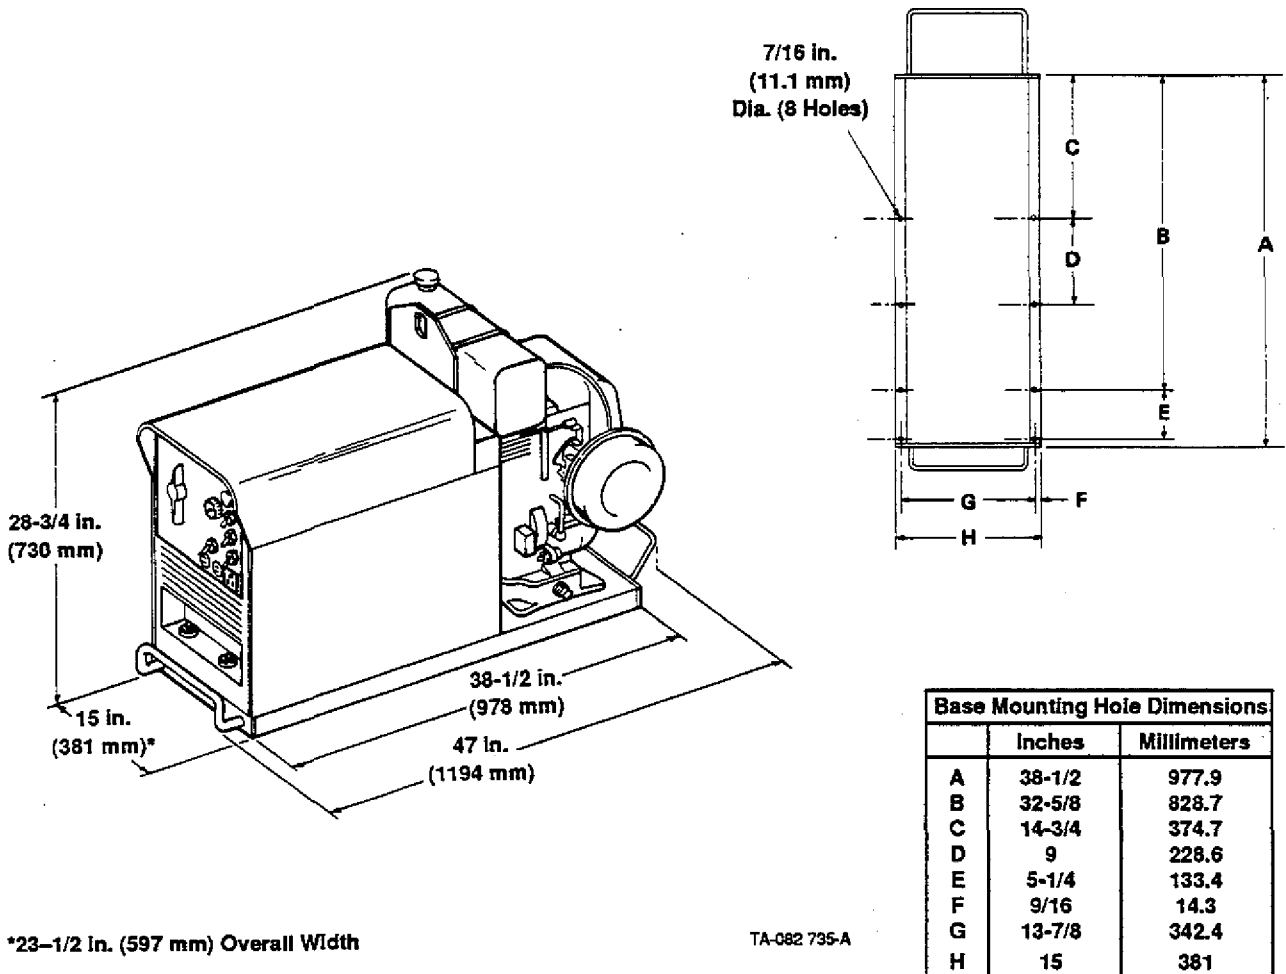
Overall Dimensions And Base Mounting Hole Layout
